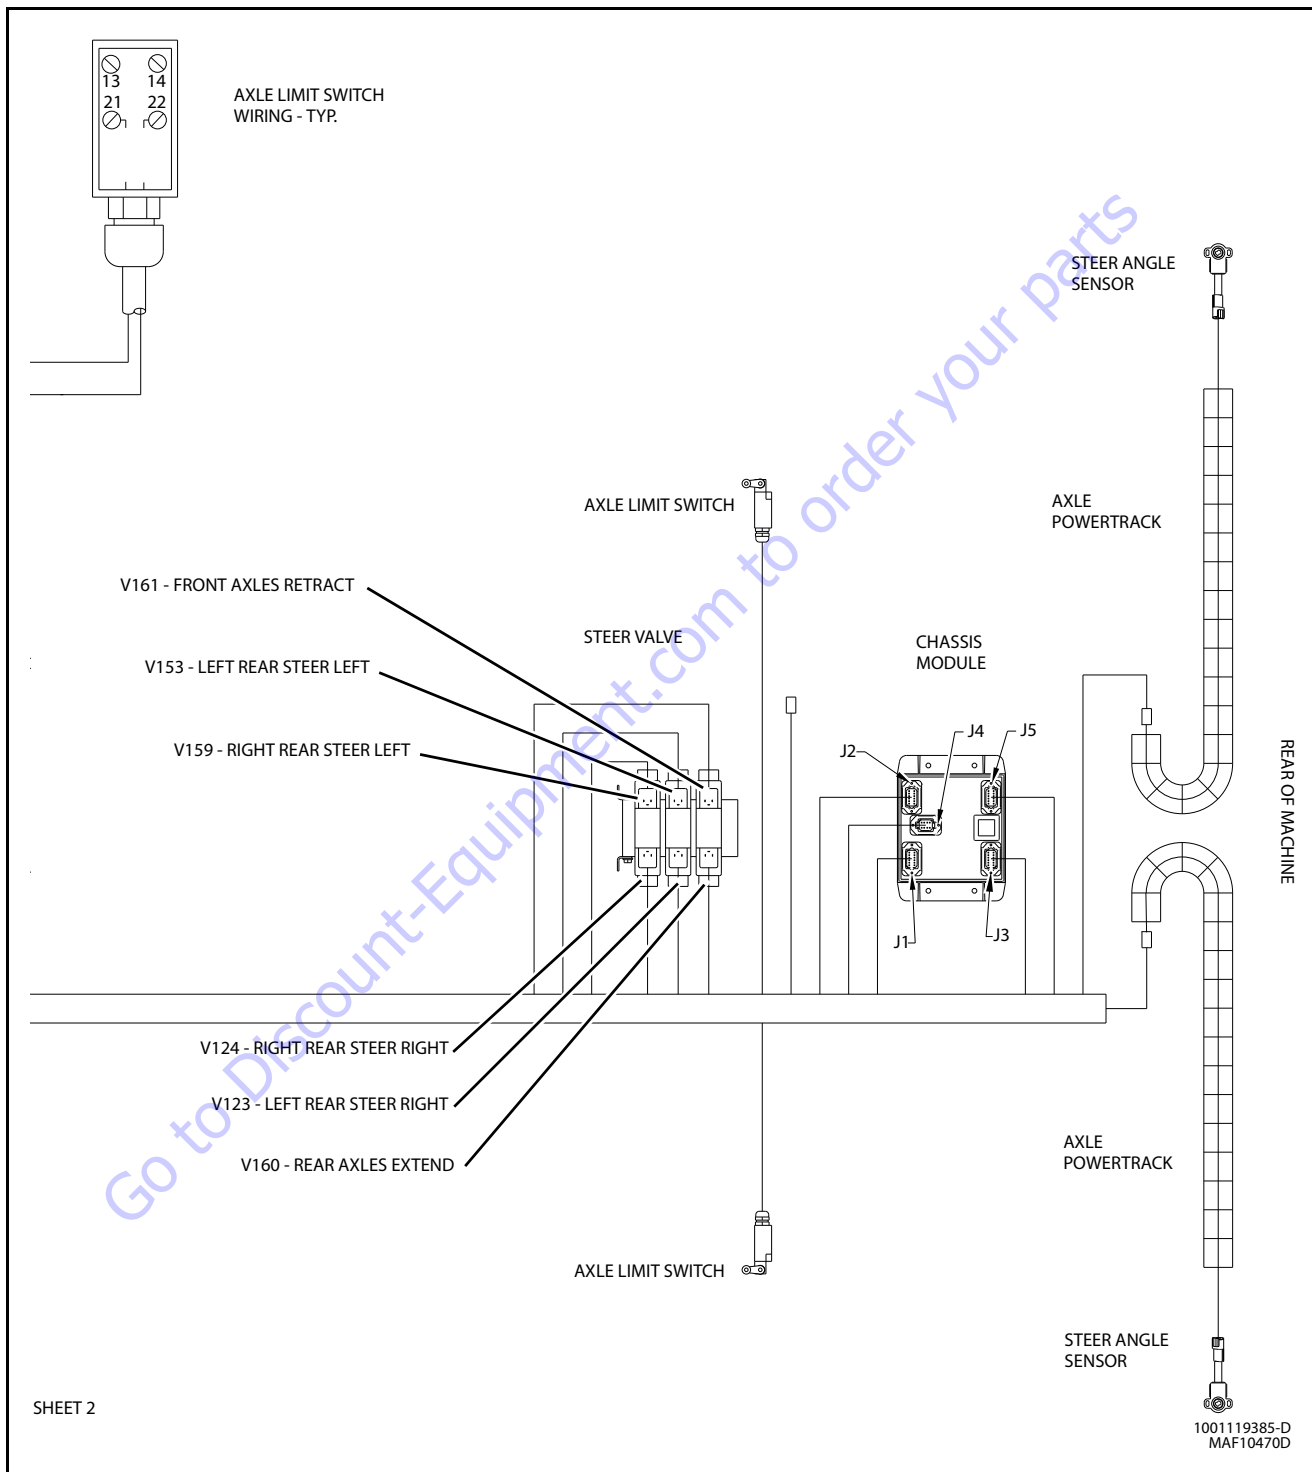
Chassis Electrical Components - Sheet 2 of 2
